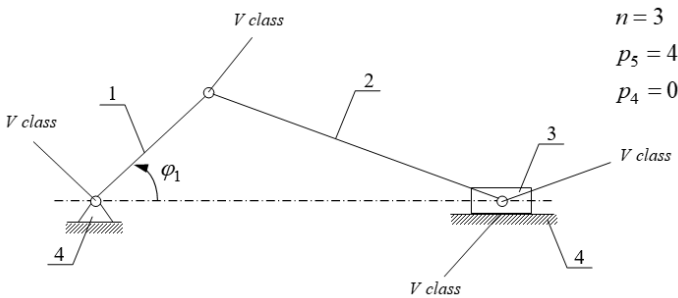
Common scheme of the crank-and-rod mechanism
